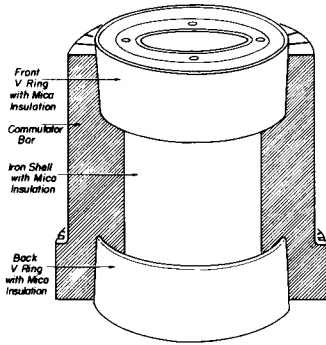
A commutator with half the bars removed and the front and back V ring in place.
